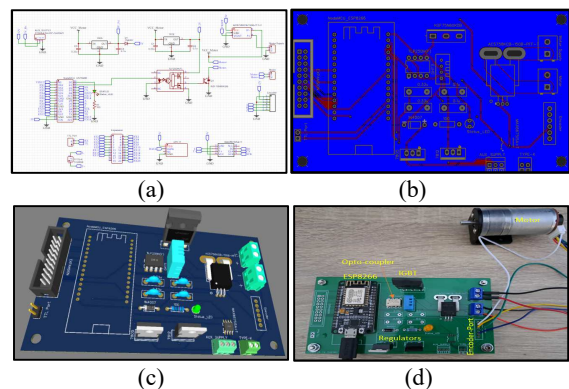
(a) Schematic of DC Motor Drive, (b) PCB layout of DC Motor Drive, (c) PCB (3D) of DC Motor Drive, (d) PCBA of DC Motor Drive
